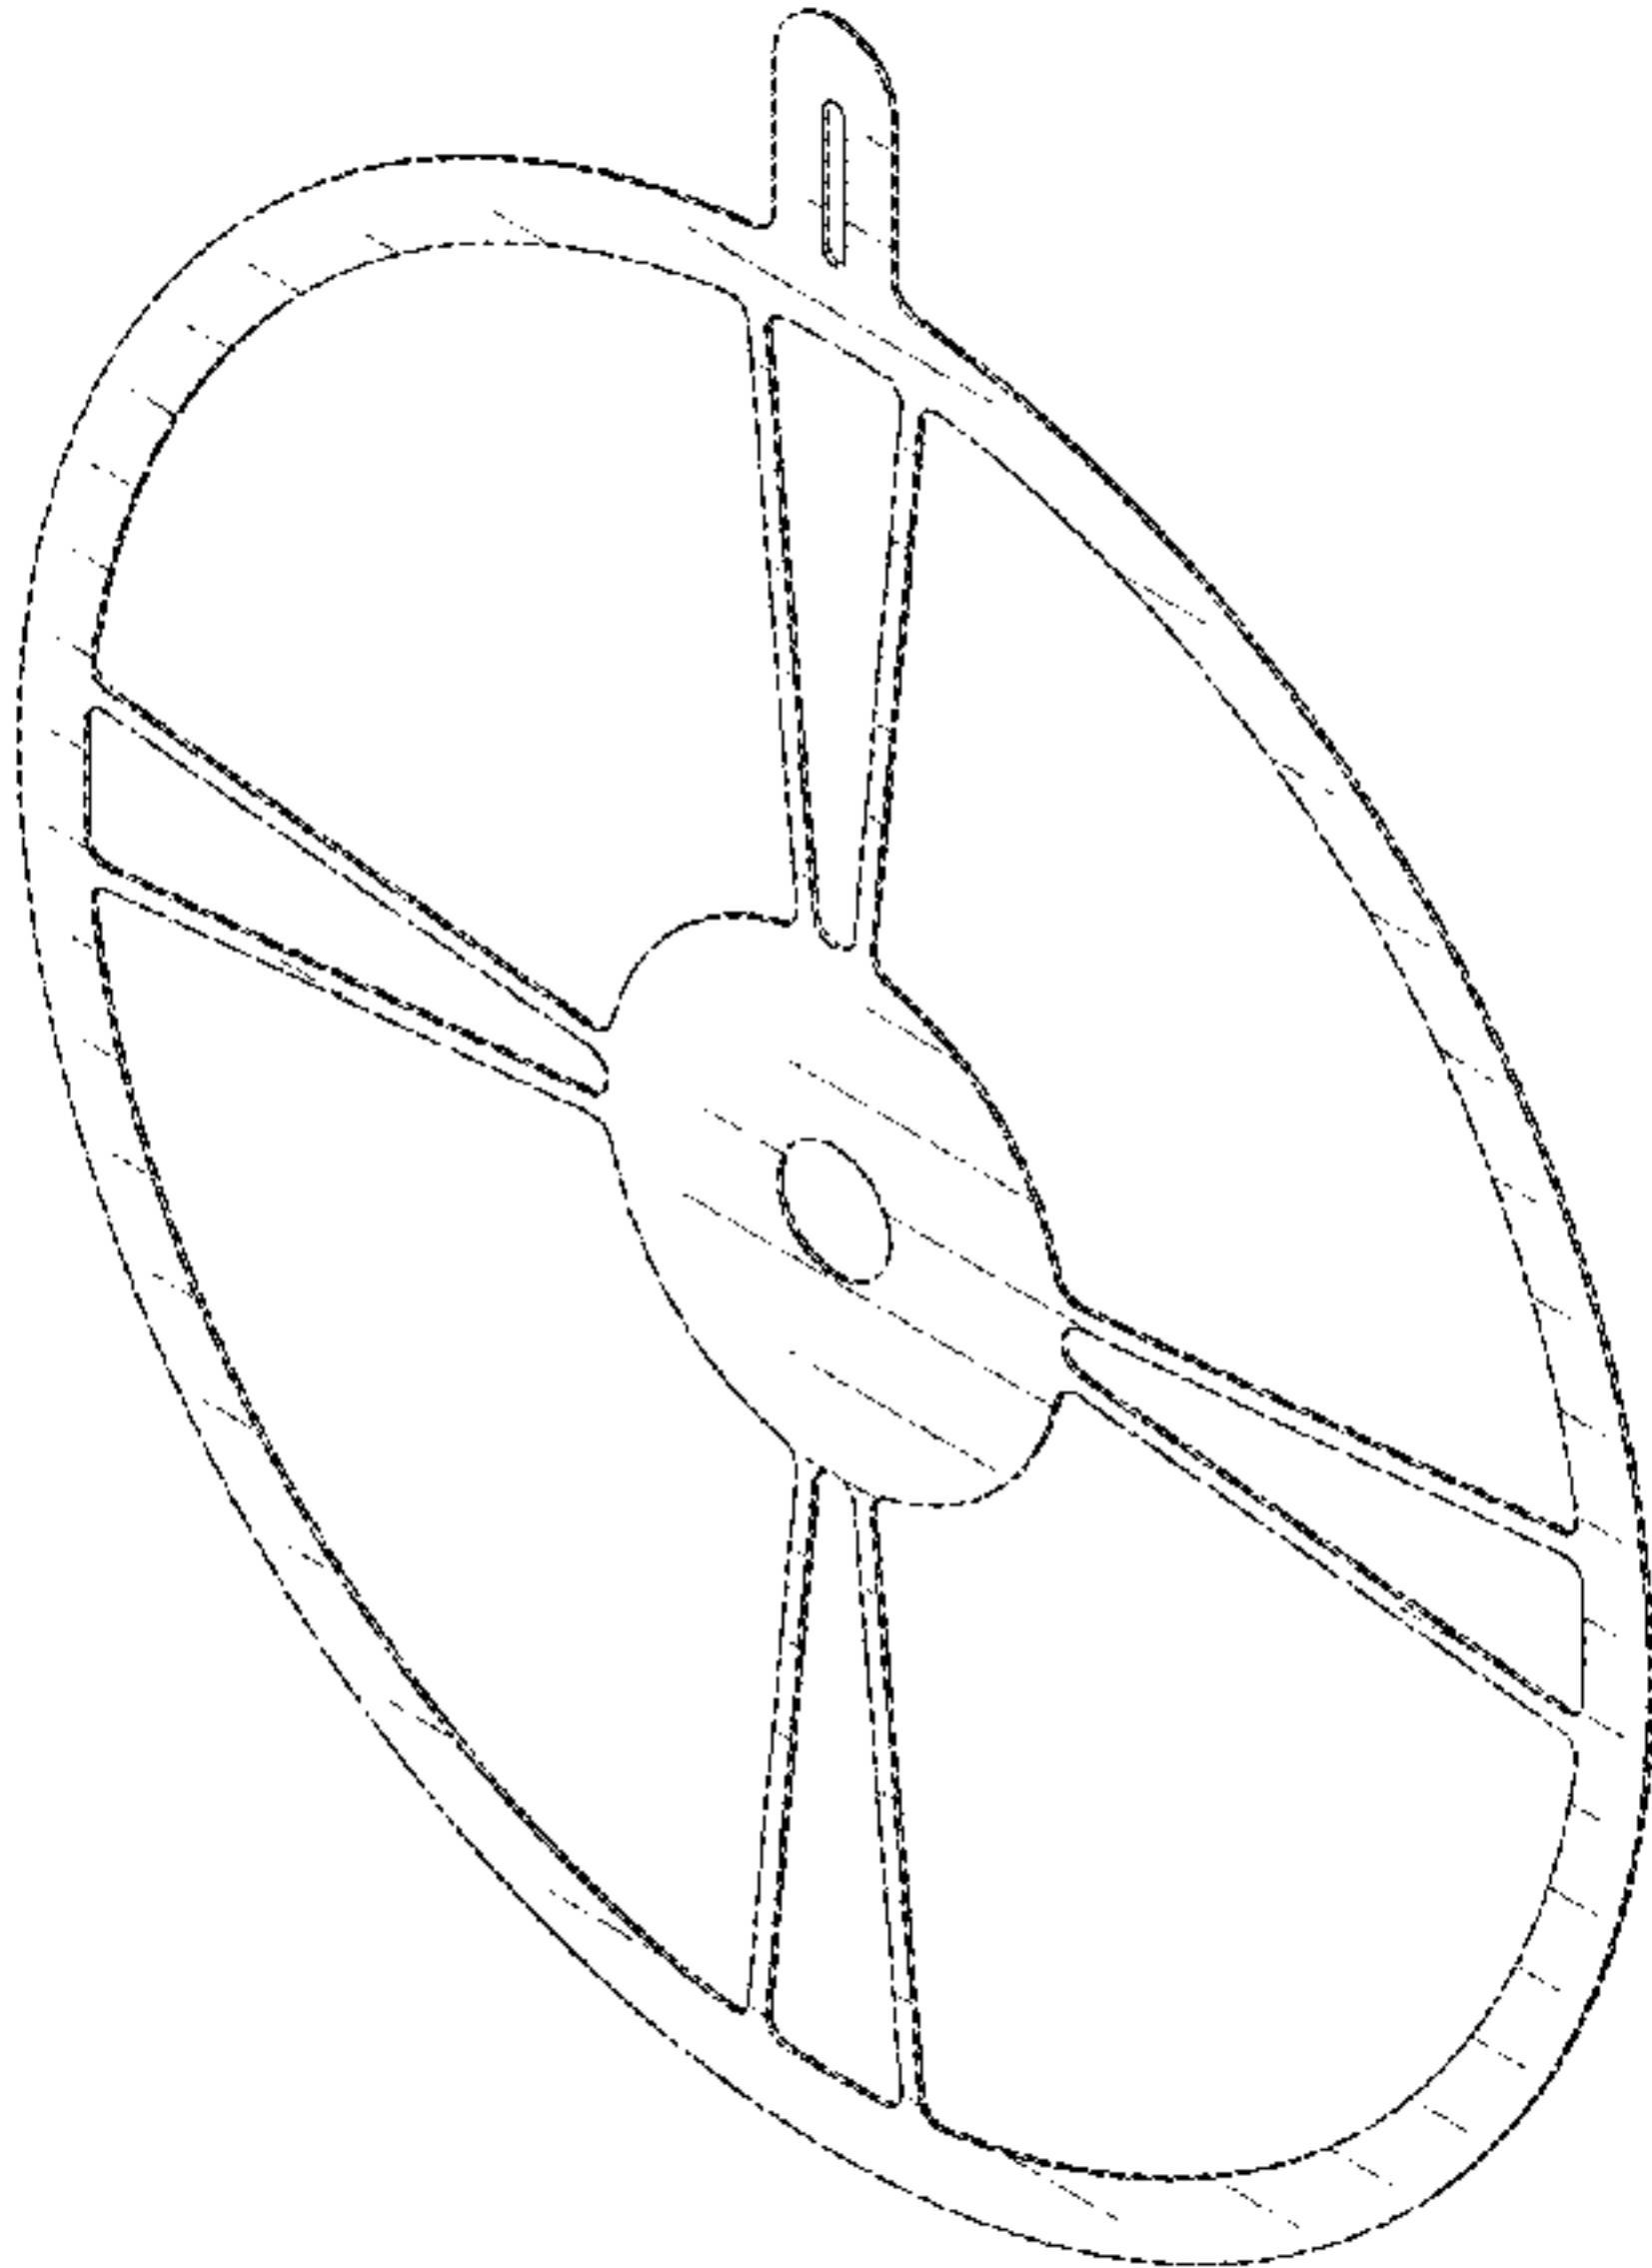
is a top, front perspective view of a filter separator showing our design.
